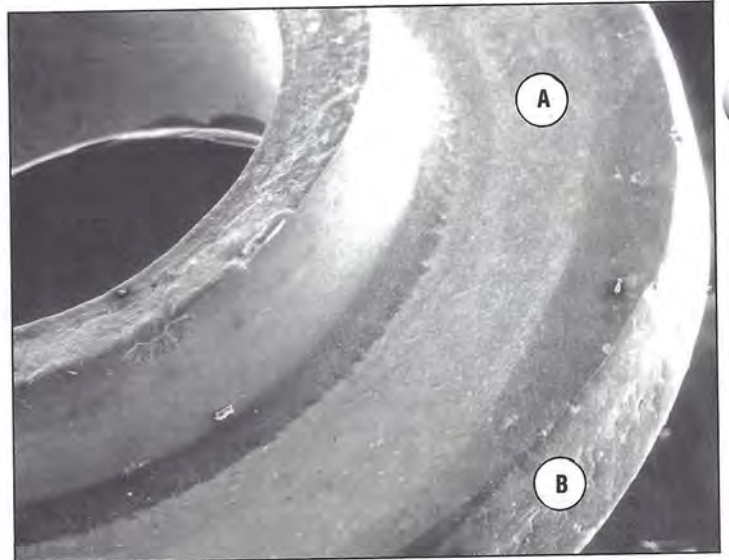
On this roller link plate, the worn region at A is expected, since this is where the side of the roller contacts the plate. The plate's edge (B) is noticeably fractured, indicating that it was stamped from sheet metal prior to heat treatment (when the metal was more formable). 38X.
